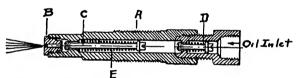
A. Spray valve body. B. Spray nozzle. C. Inner check valve. D. Outer check valve. E. Valve spring.
